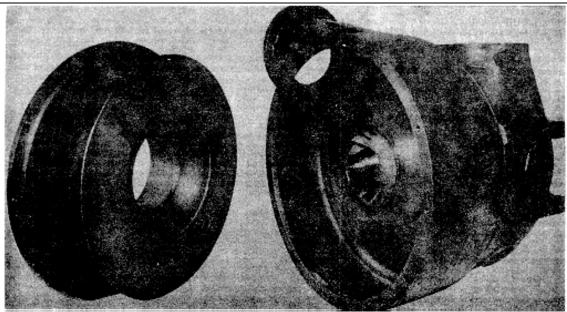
Partially Dismantled View Showing Blower Inlet Removed for Cleaning.
